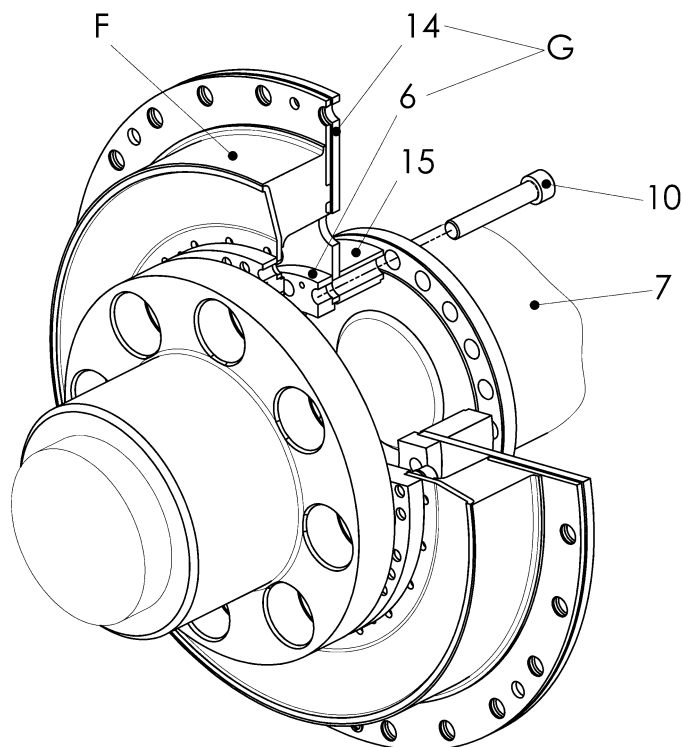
Mounting the CX-flange assembly and the adapter (15) to the hub
